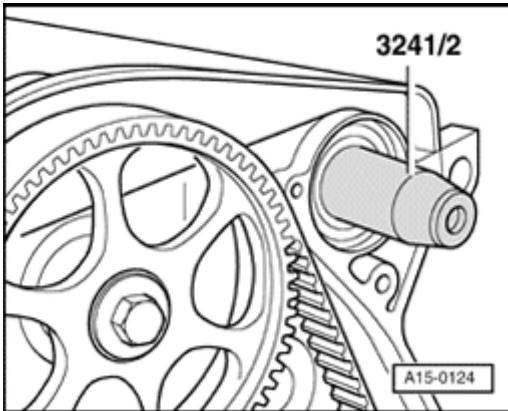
Placing Guide Sleeve 3241/2 On Camshaft Pin
